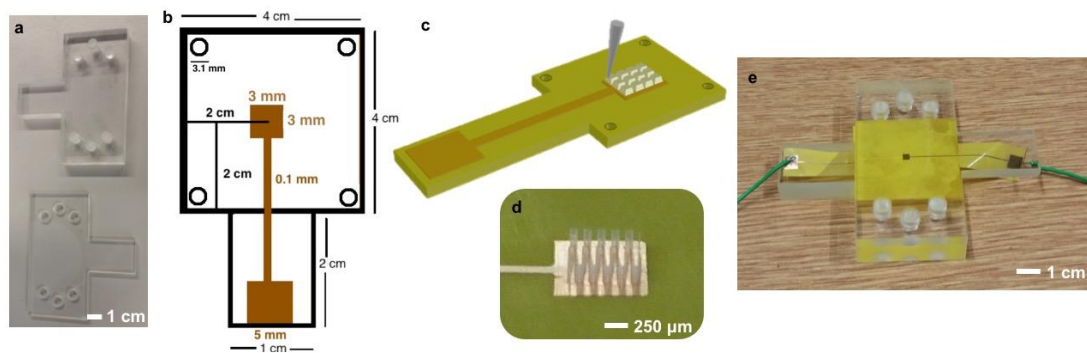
a.) Cjig made of acrylic b.) PCB design of 3 mm square contact pads c.) Schematic showing the printed dielectric on the designed PCB board d.) 3D printed raster pattern on contact pad e.) Flexible Espanex PCB inside Cjig
